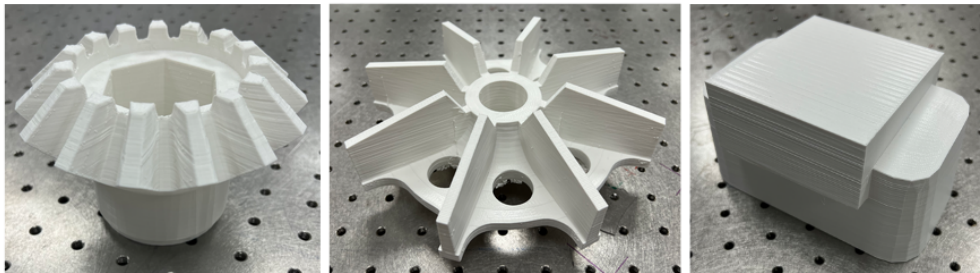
3D printed objects used in the experiments, from left to right: gear, impeller, and a mechanical component.
